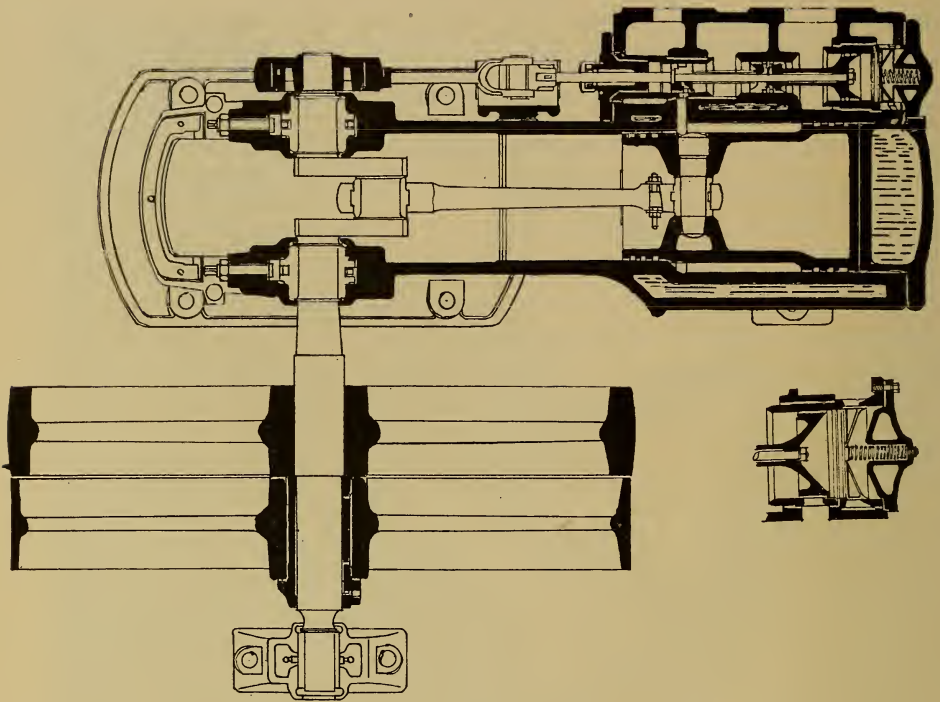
SECTIONAL PLAN OF BELT-DRIVEN TWO-STAGE COMPRESSOR WITH KOSTER VALVE GEAR.
